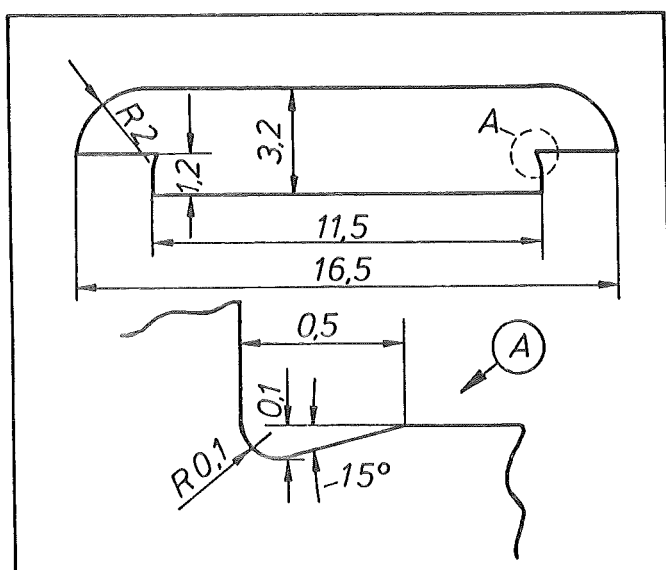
Side section of the conductor jacket manufactured by continuous forming process. A) according to DIN 509 (All dimensions in mm).
